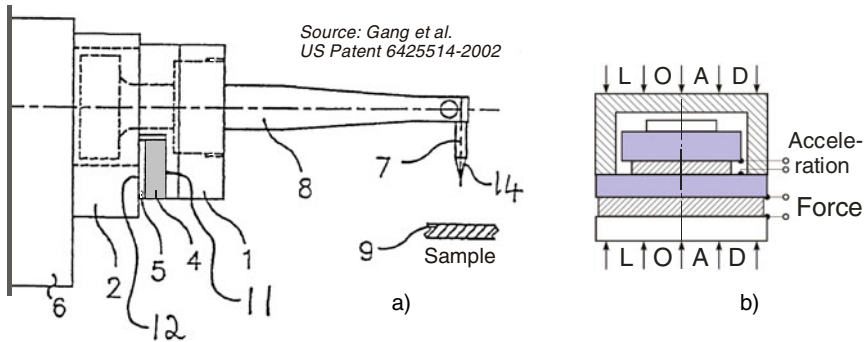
Applications with piezoelectric force transducers: a) ultrasonic welding machine, b) impedance head for mobility measurements
